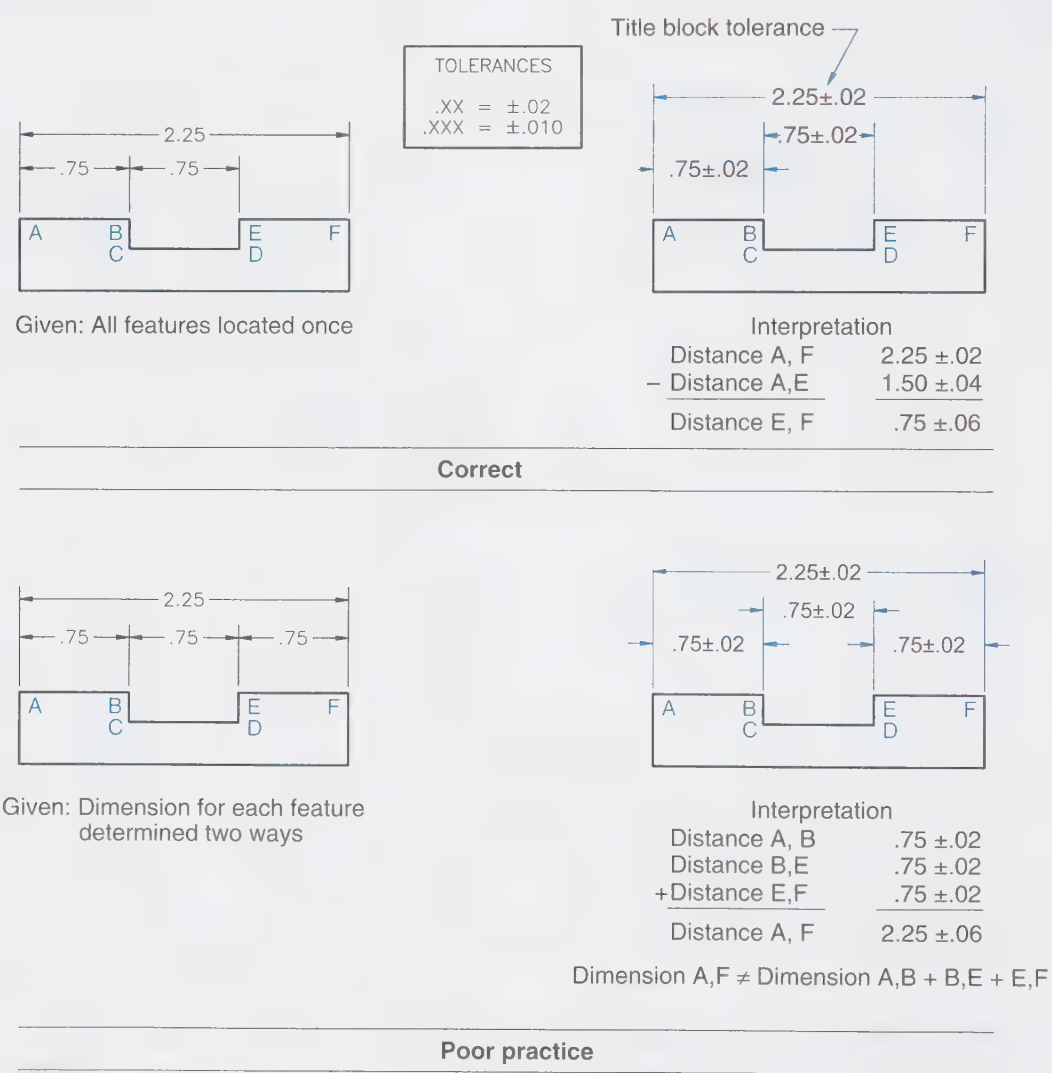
Double dimensioning causes an unacceptable conflict between the tolerance accumulations on a part.
